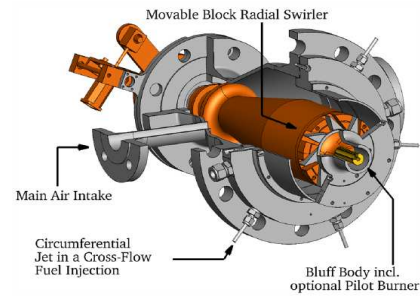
Detail of the movable block radial swirler and nozzles for fuel injection [18].
